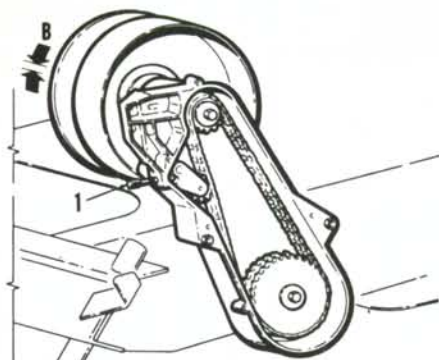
View of "CHAPARRAL" chain case used on 1972 models except SKYLARK. Turn adjusting stud (1) until backlash (B) is $\frac{1}{4}$ -inch. Relative position of brake unit will not be changed by chain adjustment on these models.
